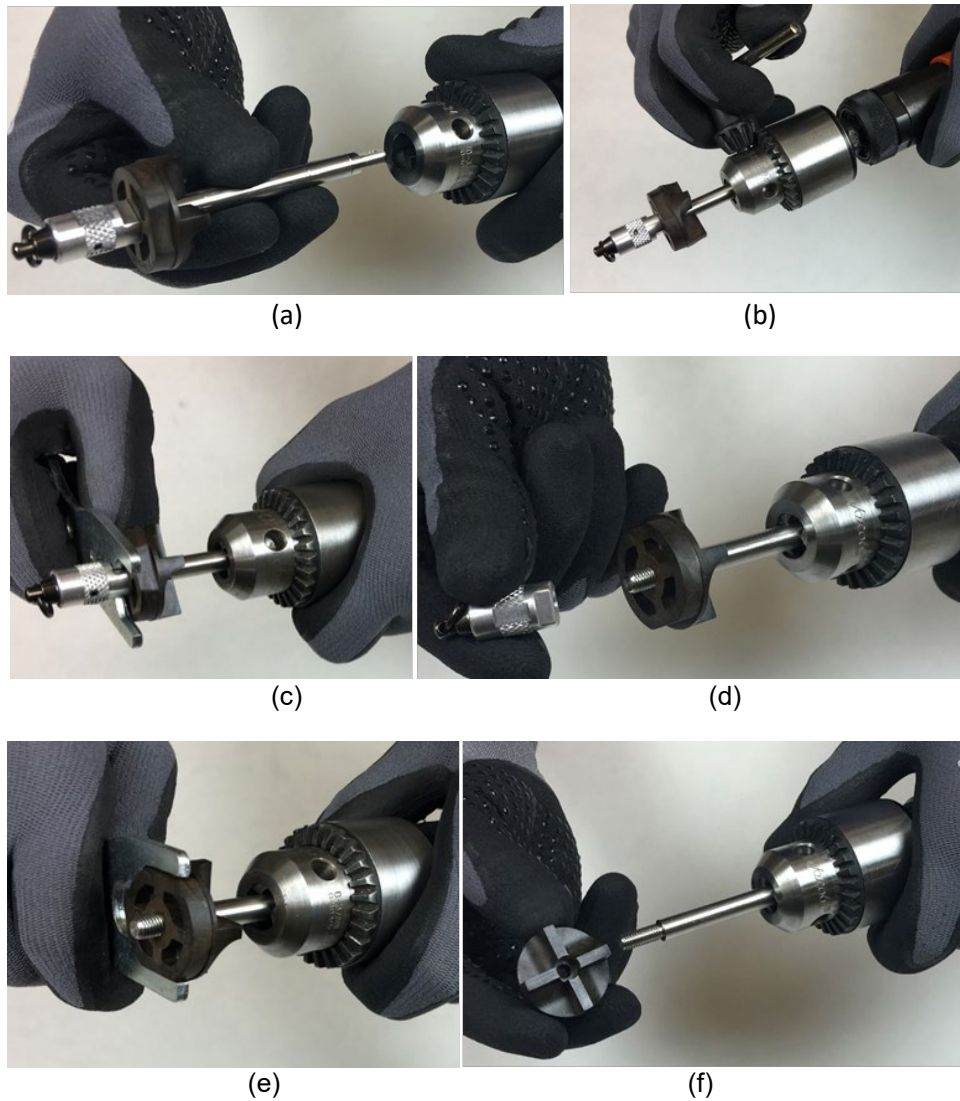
Removing Torlon Adhesive Cutters and Swivels from the Segmented Mandrel Drill Motor
